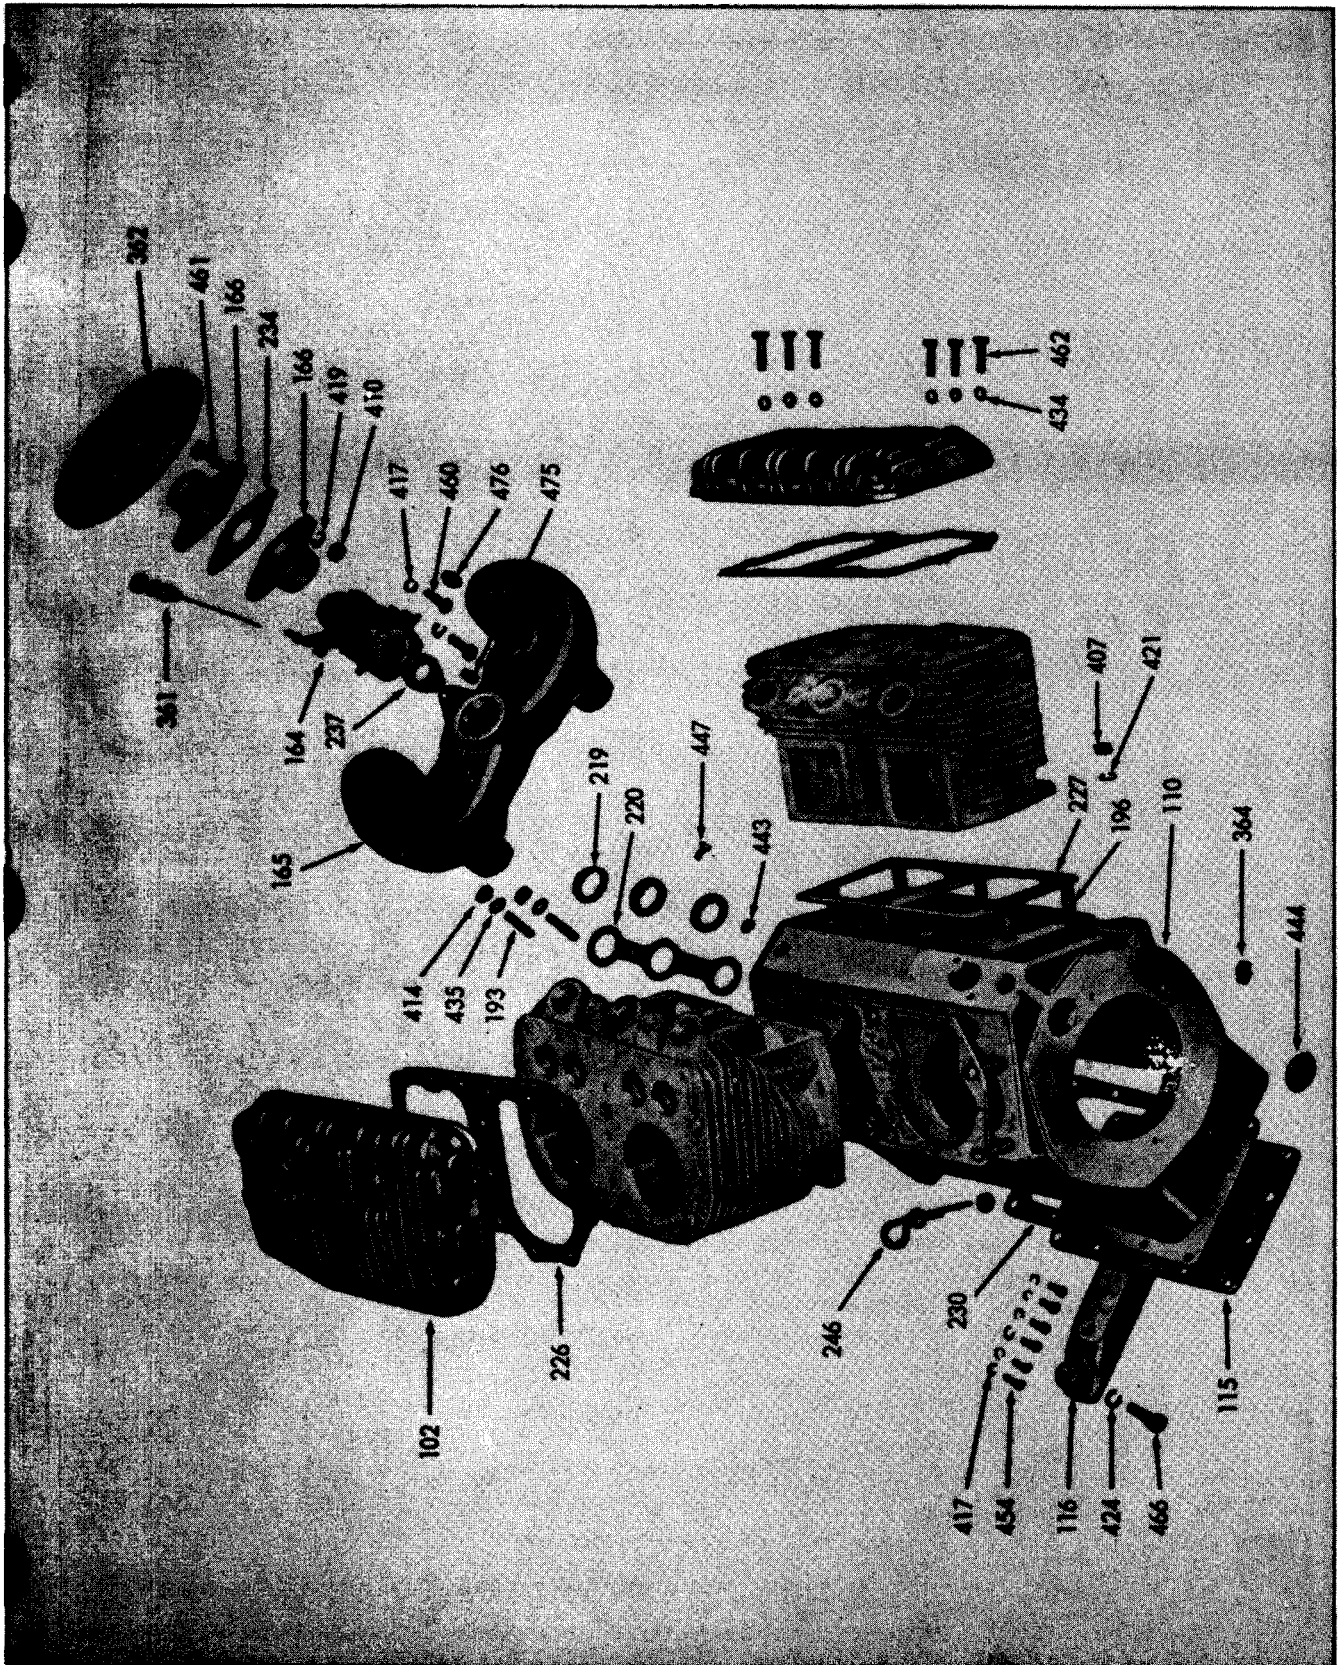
, MANIFOLD AND CRANKCASE GROUP
